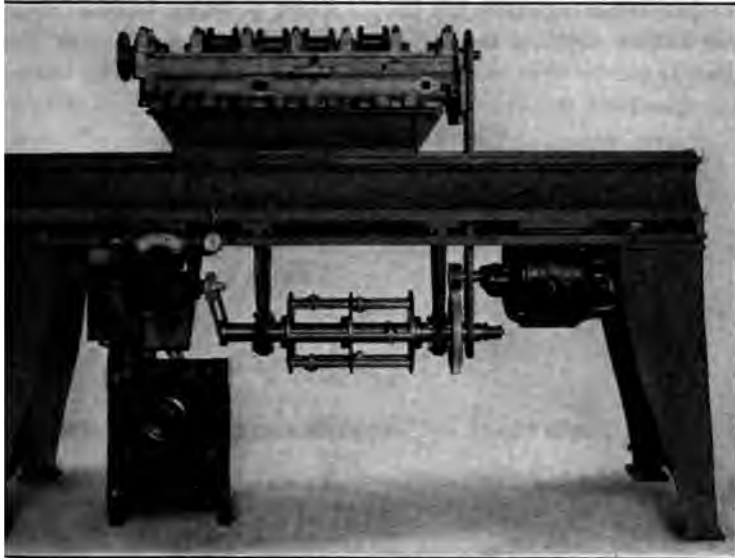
DYNAMIC BALANCING MACHINE. BALANCING AUTOMOBILE ENGINE AXLE
